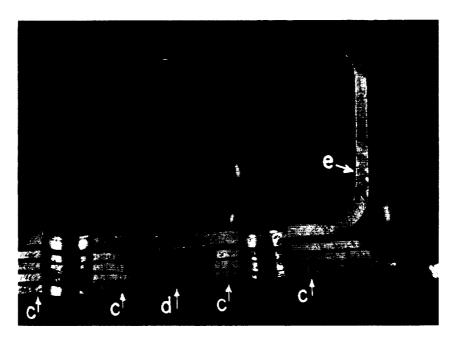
A portion of the fatigue fracture indicated by arrow "a", figure 5. Arrows "c" indicate flat fracture areas; arrows "d" and "e," slant fractures. X 2.
